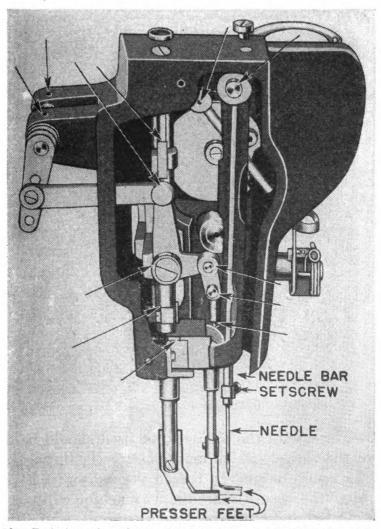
End view of machine, with faceplate removed, showing oiling points.
